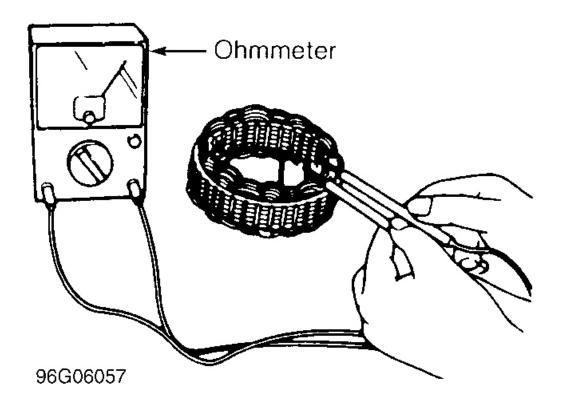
Checking Stator Winding Continuity Courtesy of MAZDA MOTORS CORP.
